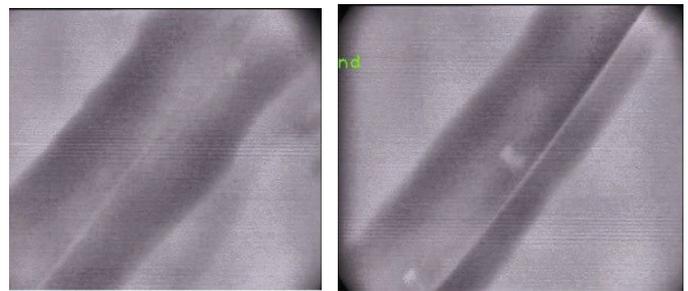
The original images. (a) Mono weld defect.; (b) Multi weld defect..
